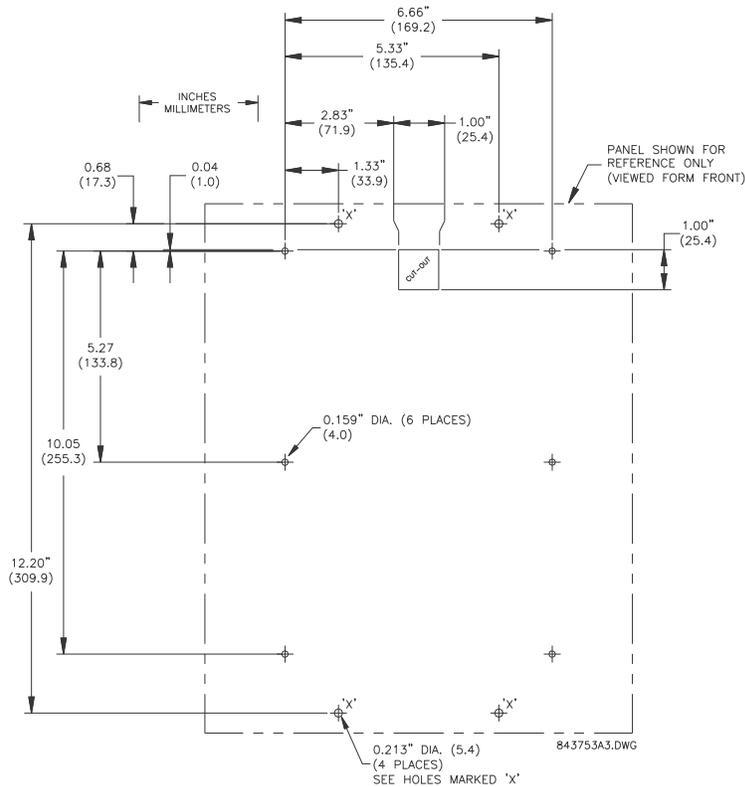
F60 VERTICAL SIDE MOUNTING REAR DIMENSIONS (STANDARD PANEL)
